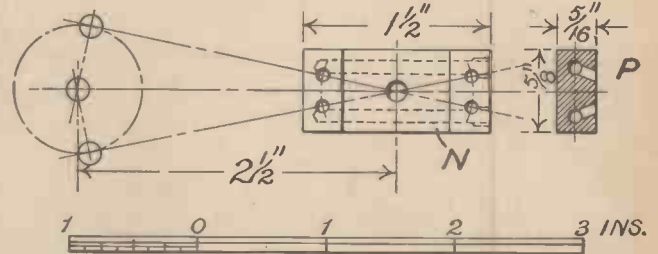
Sectional view of cylinder and steam distributing block, and details of steam ports.
